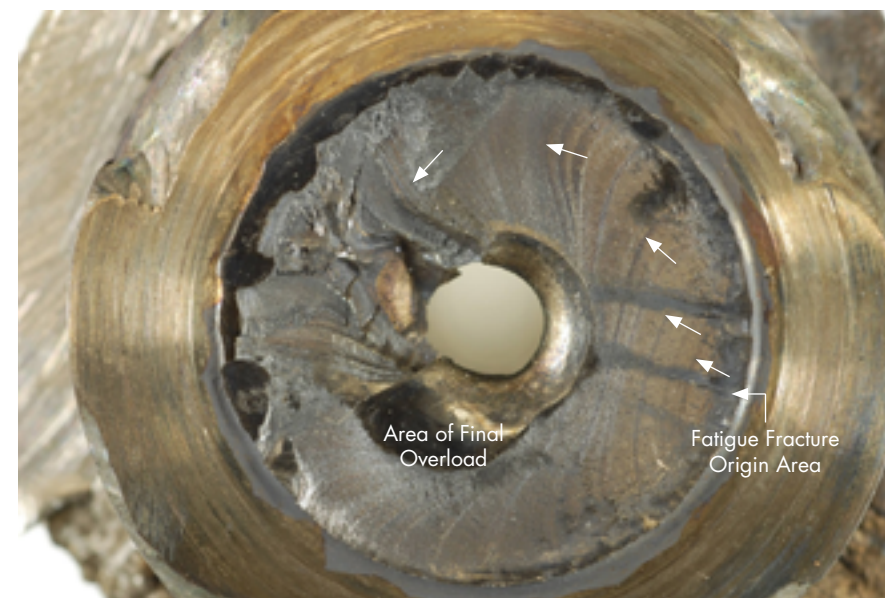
The thermowell fracture surface on the thermowell fitting section. Beach marks (white arrows) across the fracture surface are evident. The beach marks show the direction of fatigue crack propagation, which goes around the center hole.
